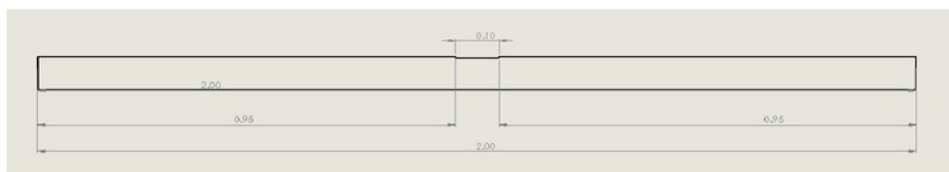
(b) Artificial Cracked Straight Pipe Dimension
